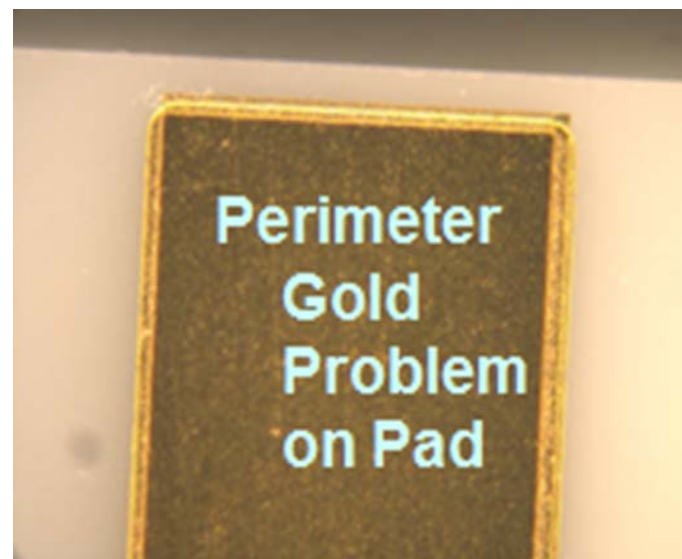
Top View of Circuit Board. Nickel Not Fully Covering a Thick Gold's Perimeter.
